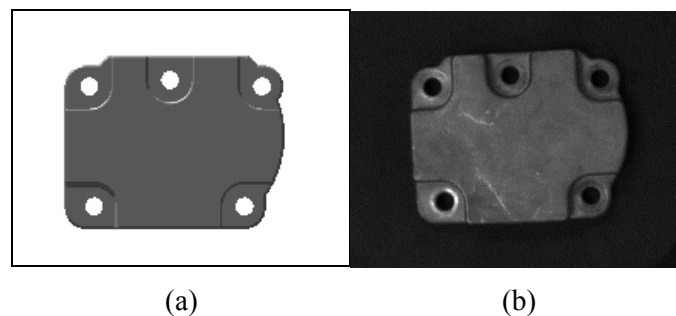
a) input CAD model of casting part and b) input image for real object of casting part
